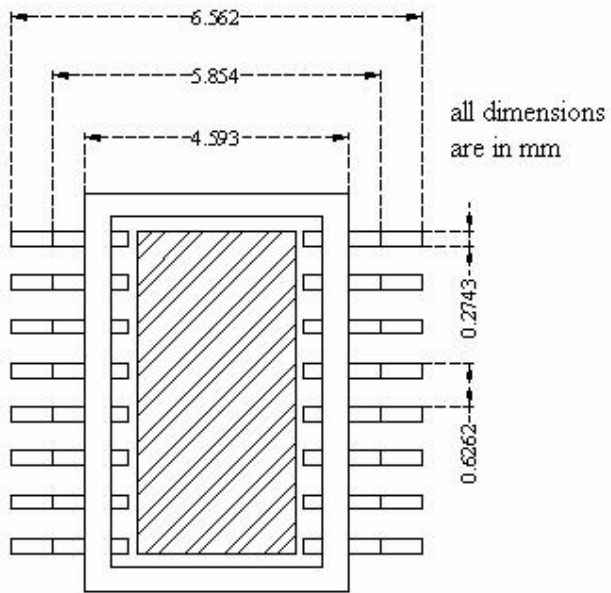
(d) Typical TSSOP 16 pins Package Geometry : Top View and Dimensions
